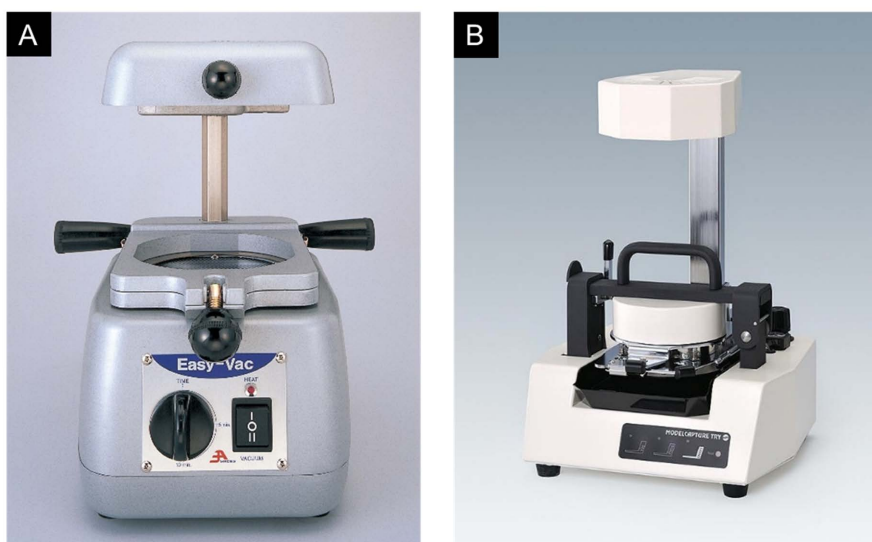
Molding machine. A: vacuum blower molding machine (Vacuum Former EV2). B: vacuum ejector/pressure molding machine (Model Capture Try).
